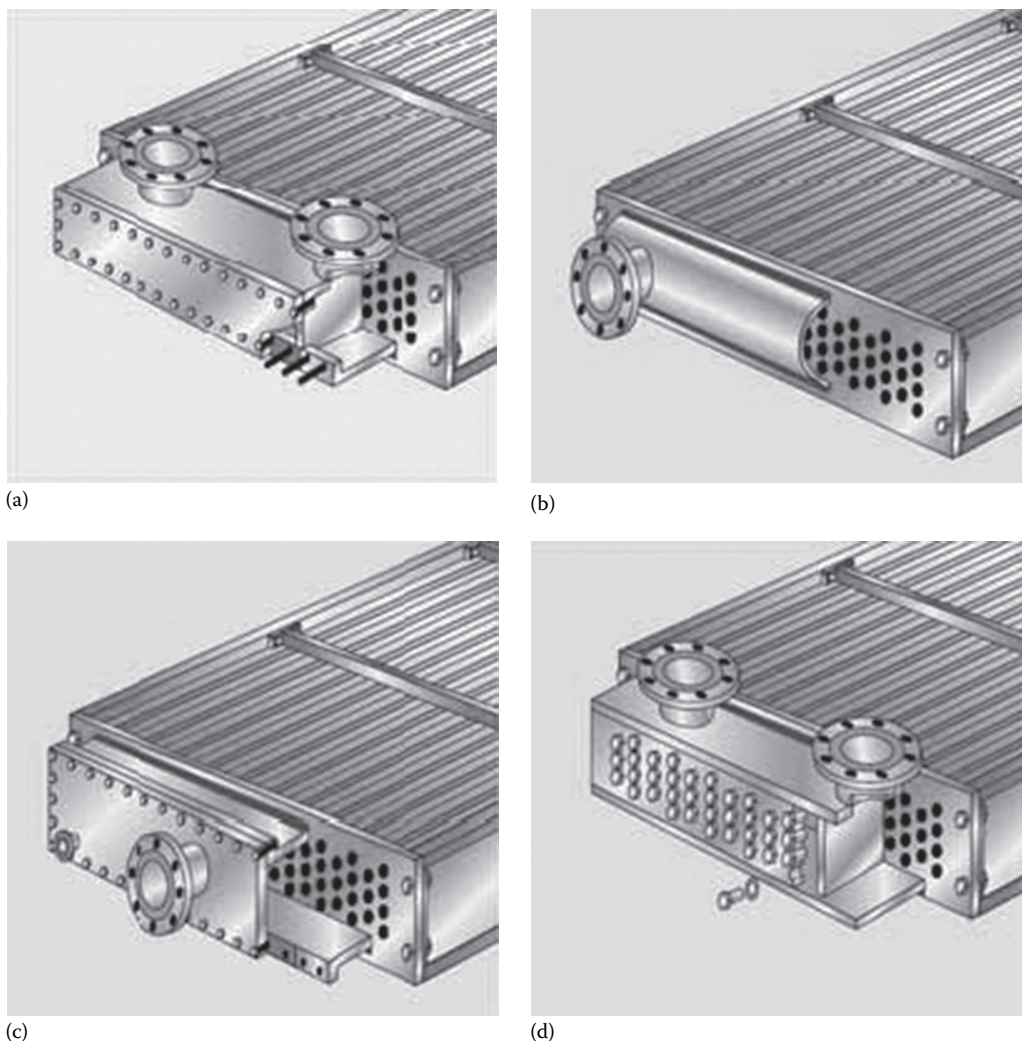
ACHE header types—(a) cover plate header with stud bolts, (b) welded header (D type), (c) cover plate header with through-bolts, and (d) plug type header. (Courtesy of GEA Luftkühler GmbH, Bochum, Germany.)
